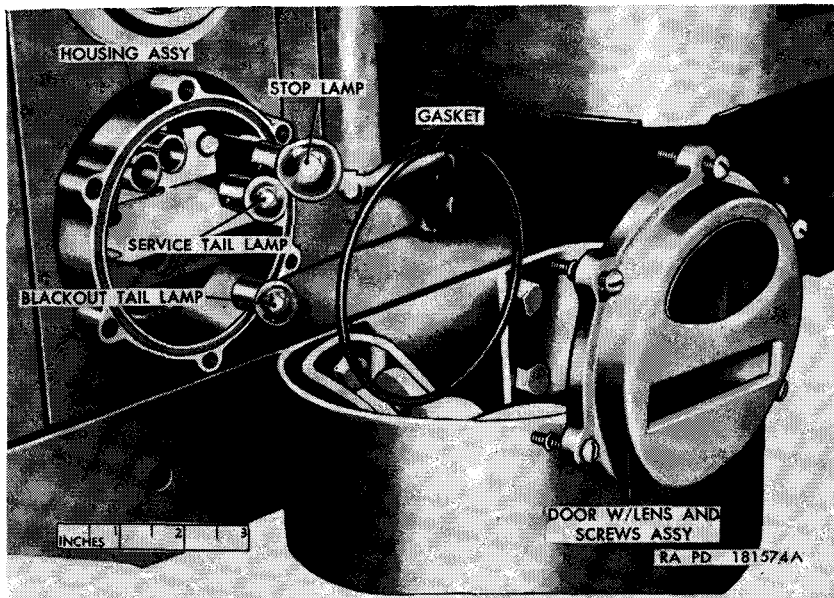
Service taillight and stoplight assembly—partially exploded view.
